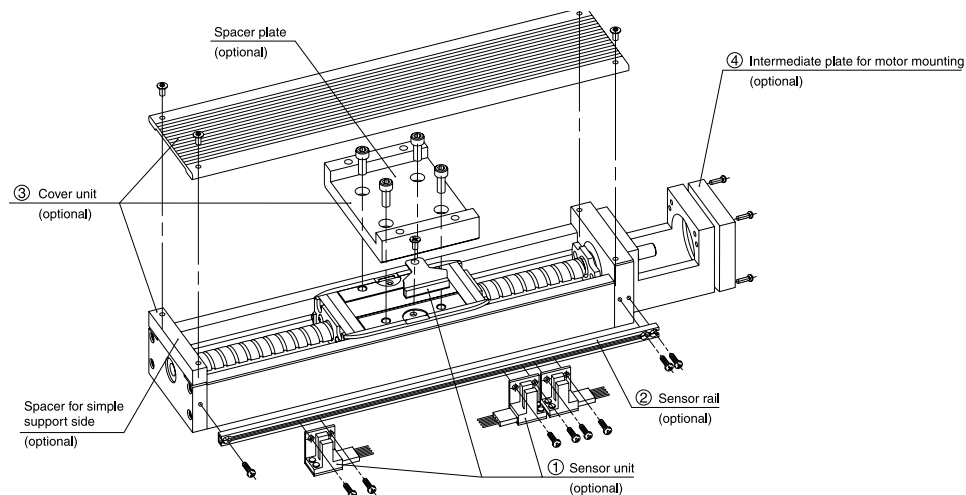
Assembly – Optional Components for MCH10 (example)
